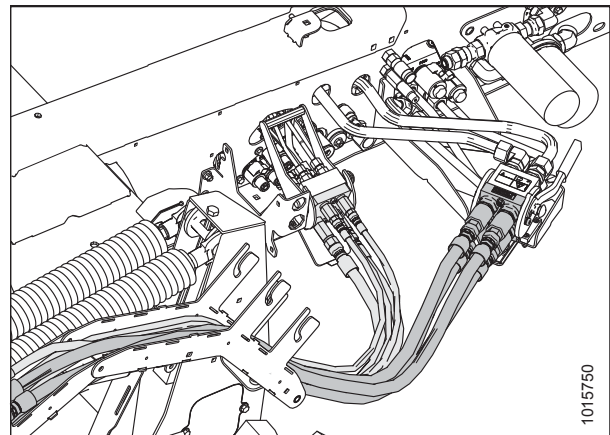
Hydraulic Multicouplers and Hose Routing
